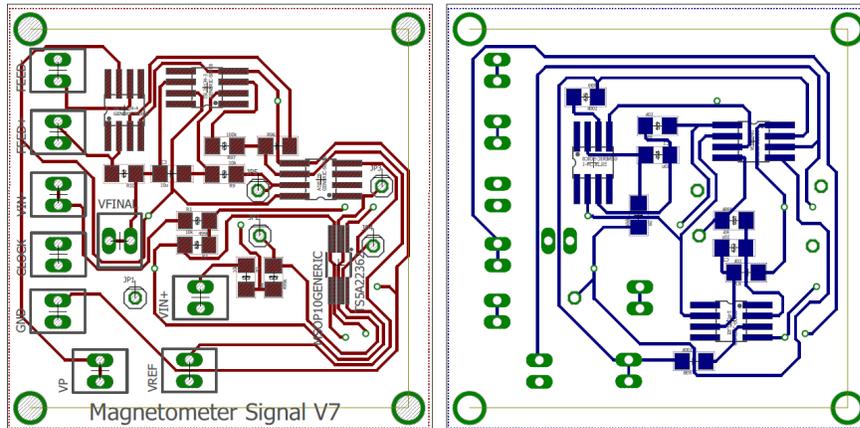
PCB CAD for the signal processing of MAG-SPEL
